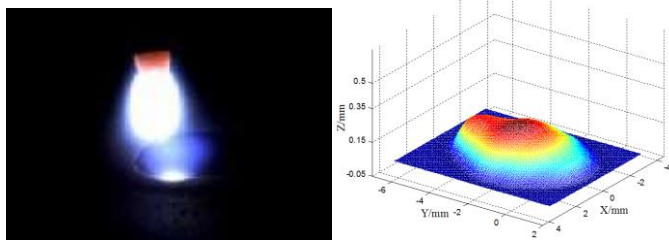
GTAW weld pool. Left: pool Image; right: reconstructed pool surface (Liu and Zhang, 2013).
